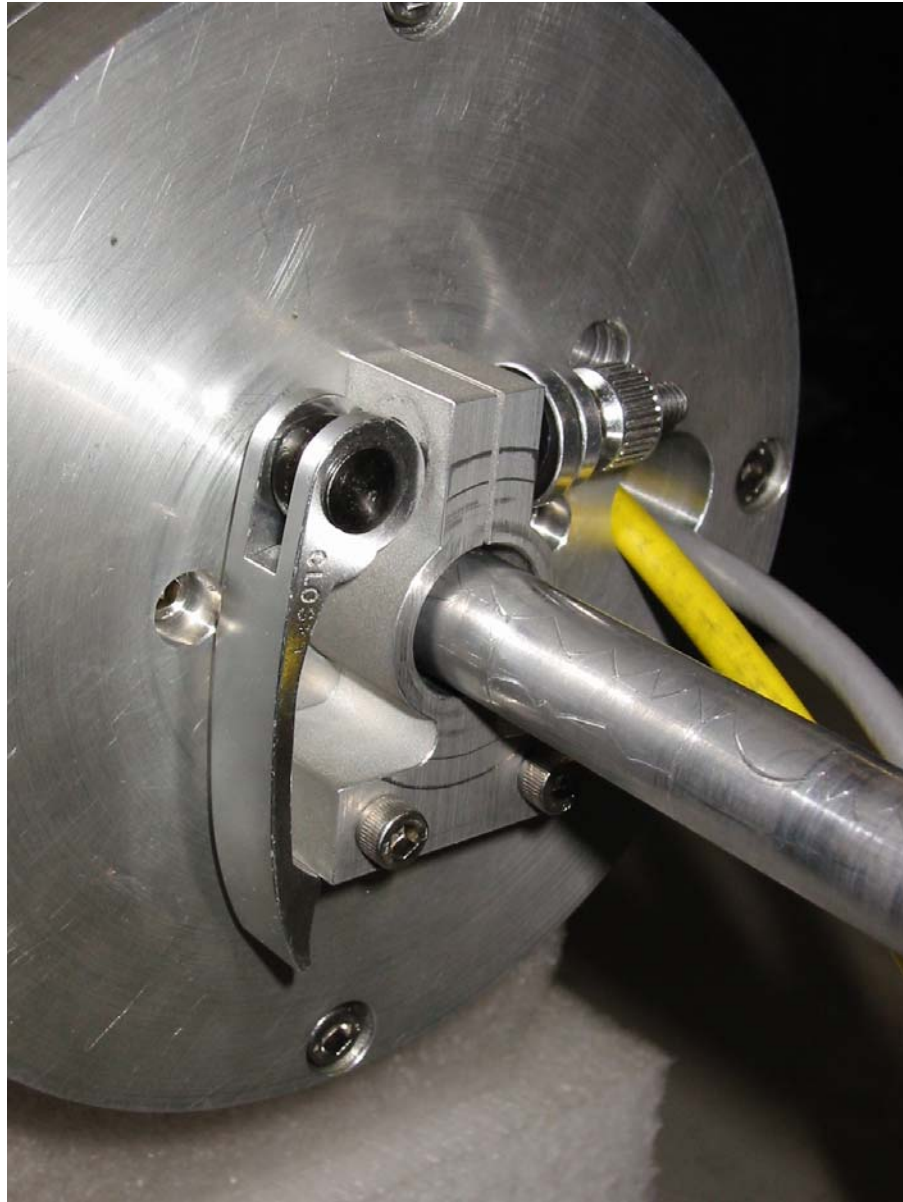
Core Position Sensor, showing locking mechanism at turning wheel end to lock the sensor arm.
